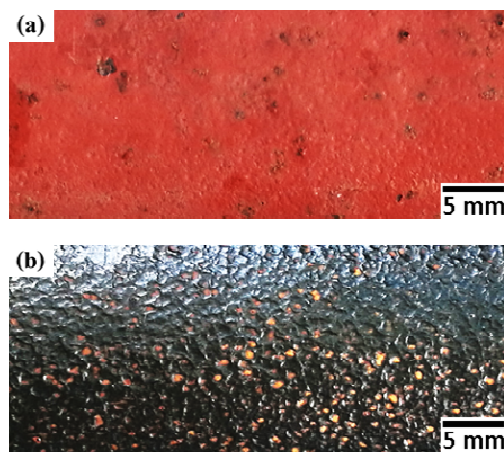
Exterior surface (a) unused tube; (b) used tube.
